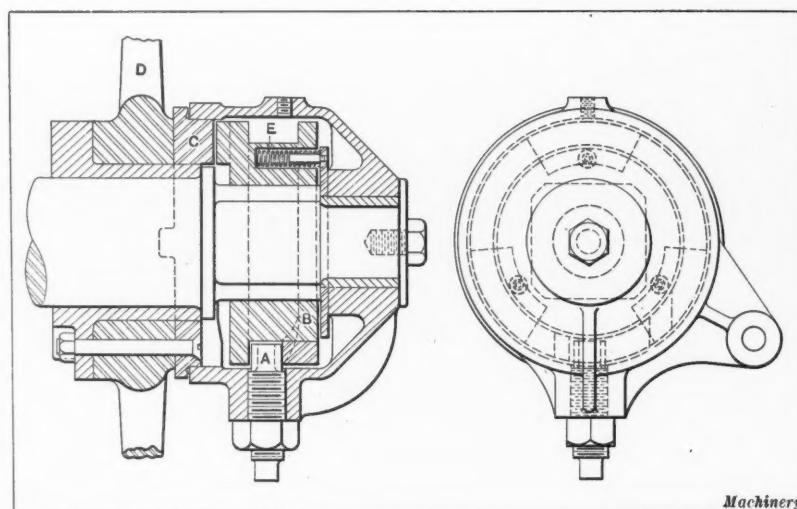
Sectional View of Clutch mounted on Driving Shaft of the Trimming Press
